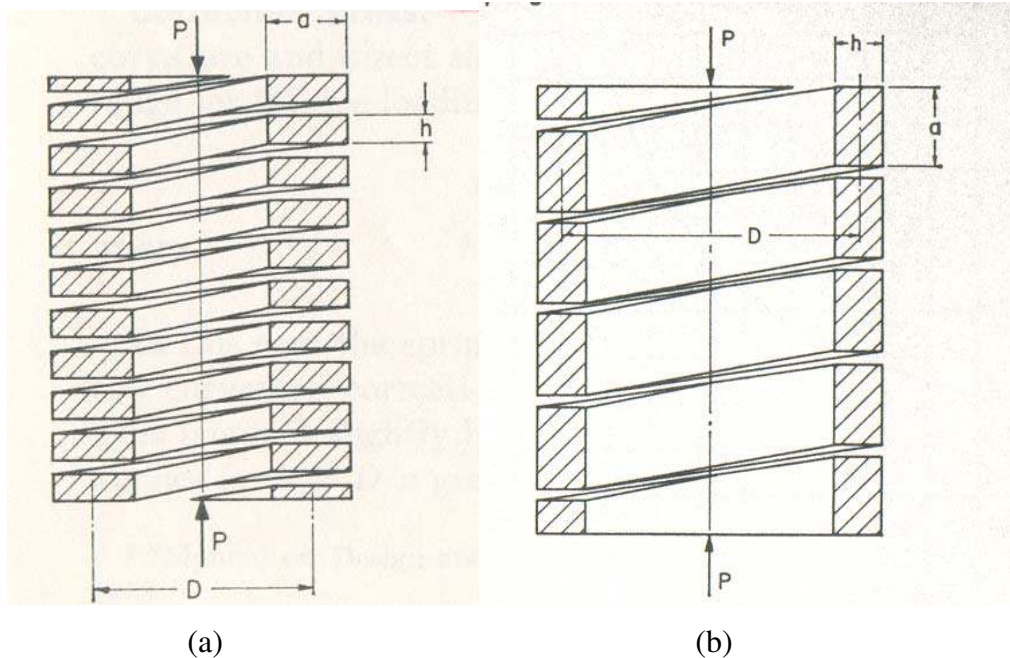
a) Helical spring of rectangular wire, coiled flat-wise,
